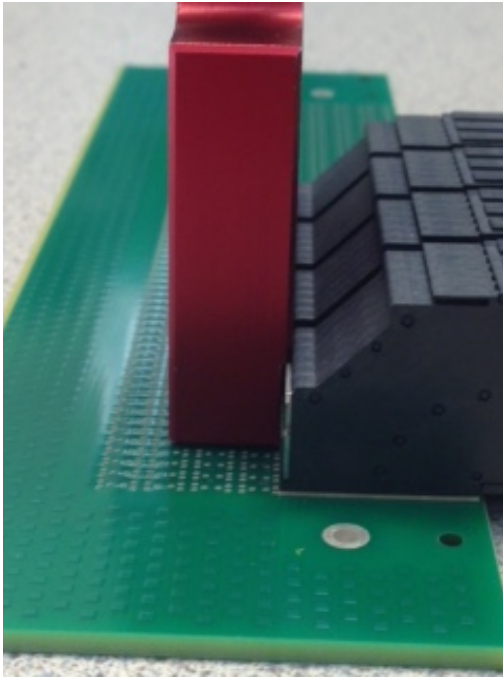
Back stiffener installation on Paladin RAF connectors pressed into a board
